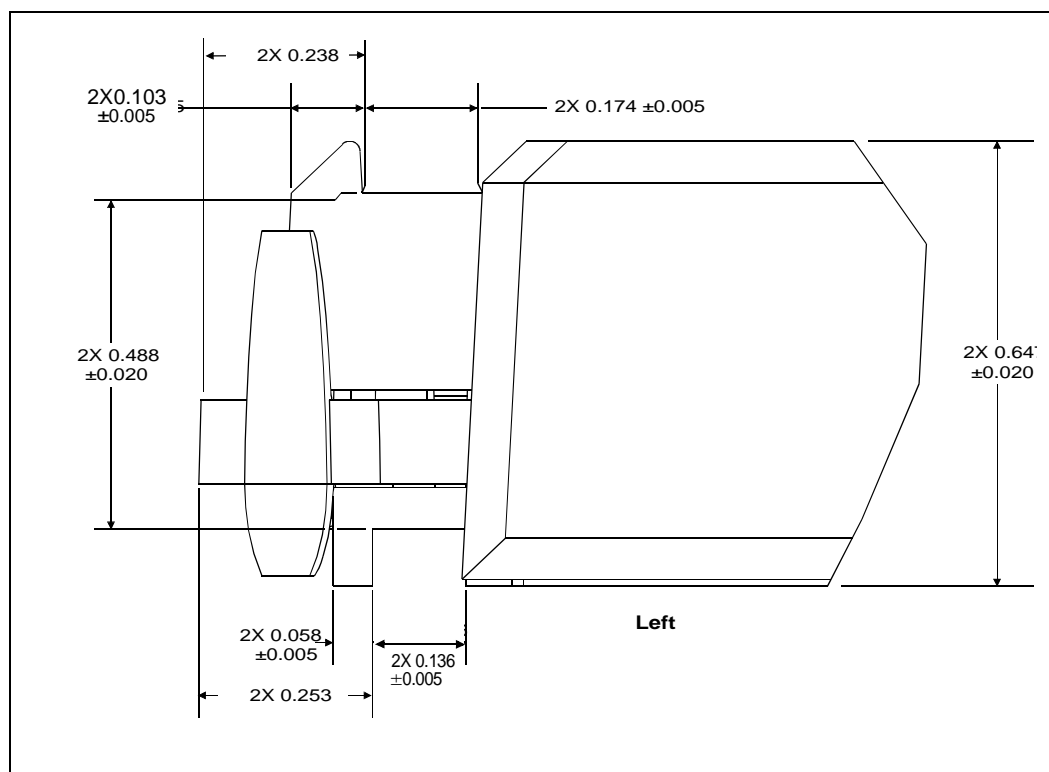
S.E.C.C. Packaged Processor — Latch Arm, Extended Thermal Plate, and Cover Detail Dimensions (Reference Dimensions Only)
